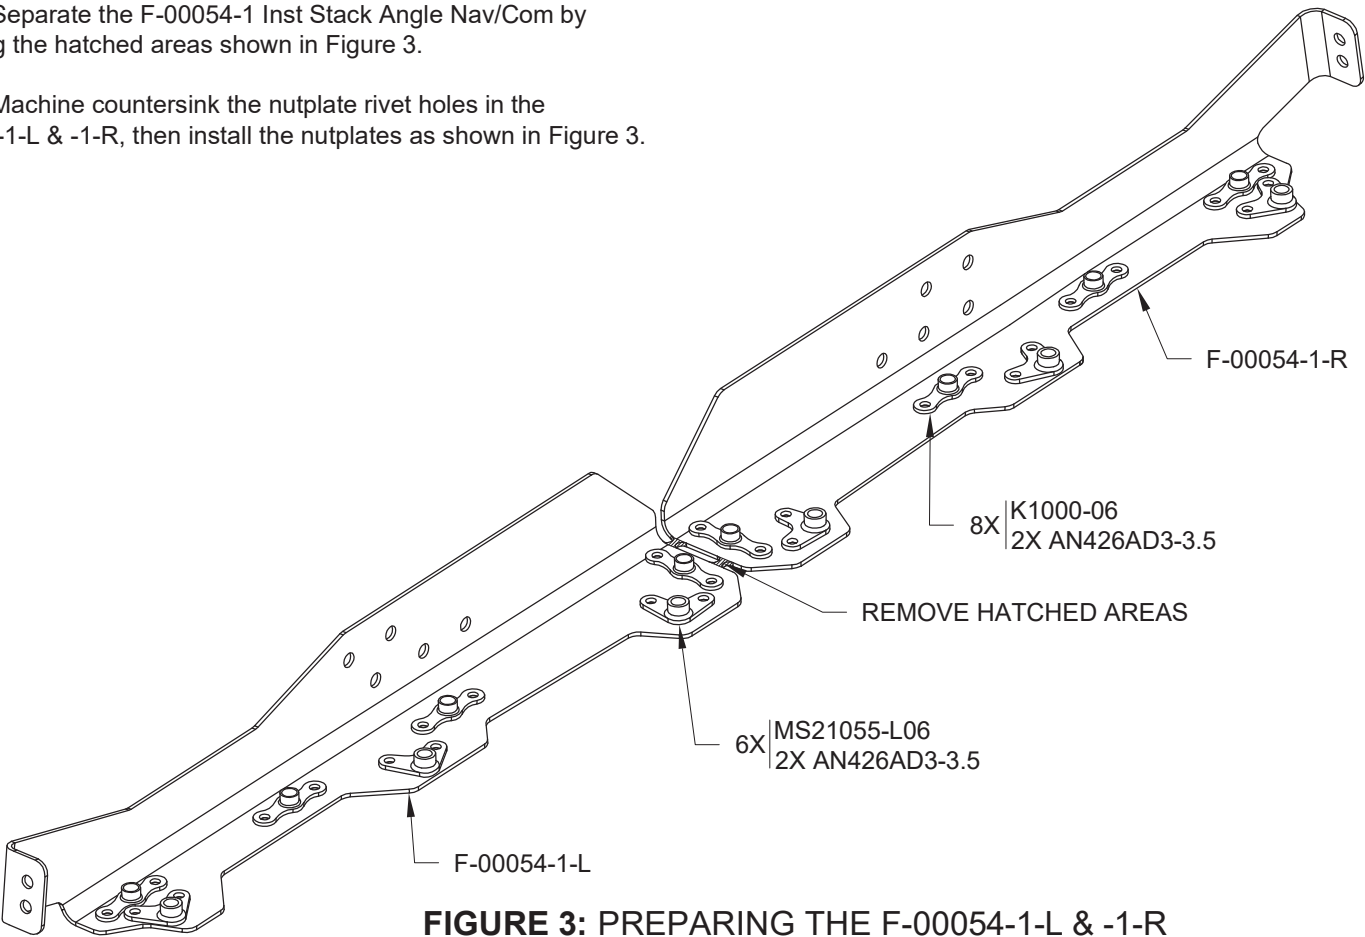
PREPARING THE F-00054-1-L & -1-R
